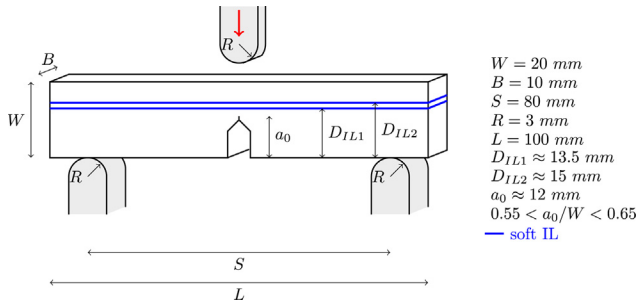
Dimensions for single edge notched bending (SENB) specimens.
